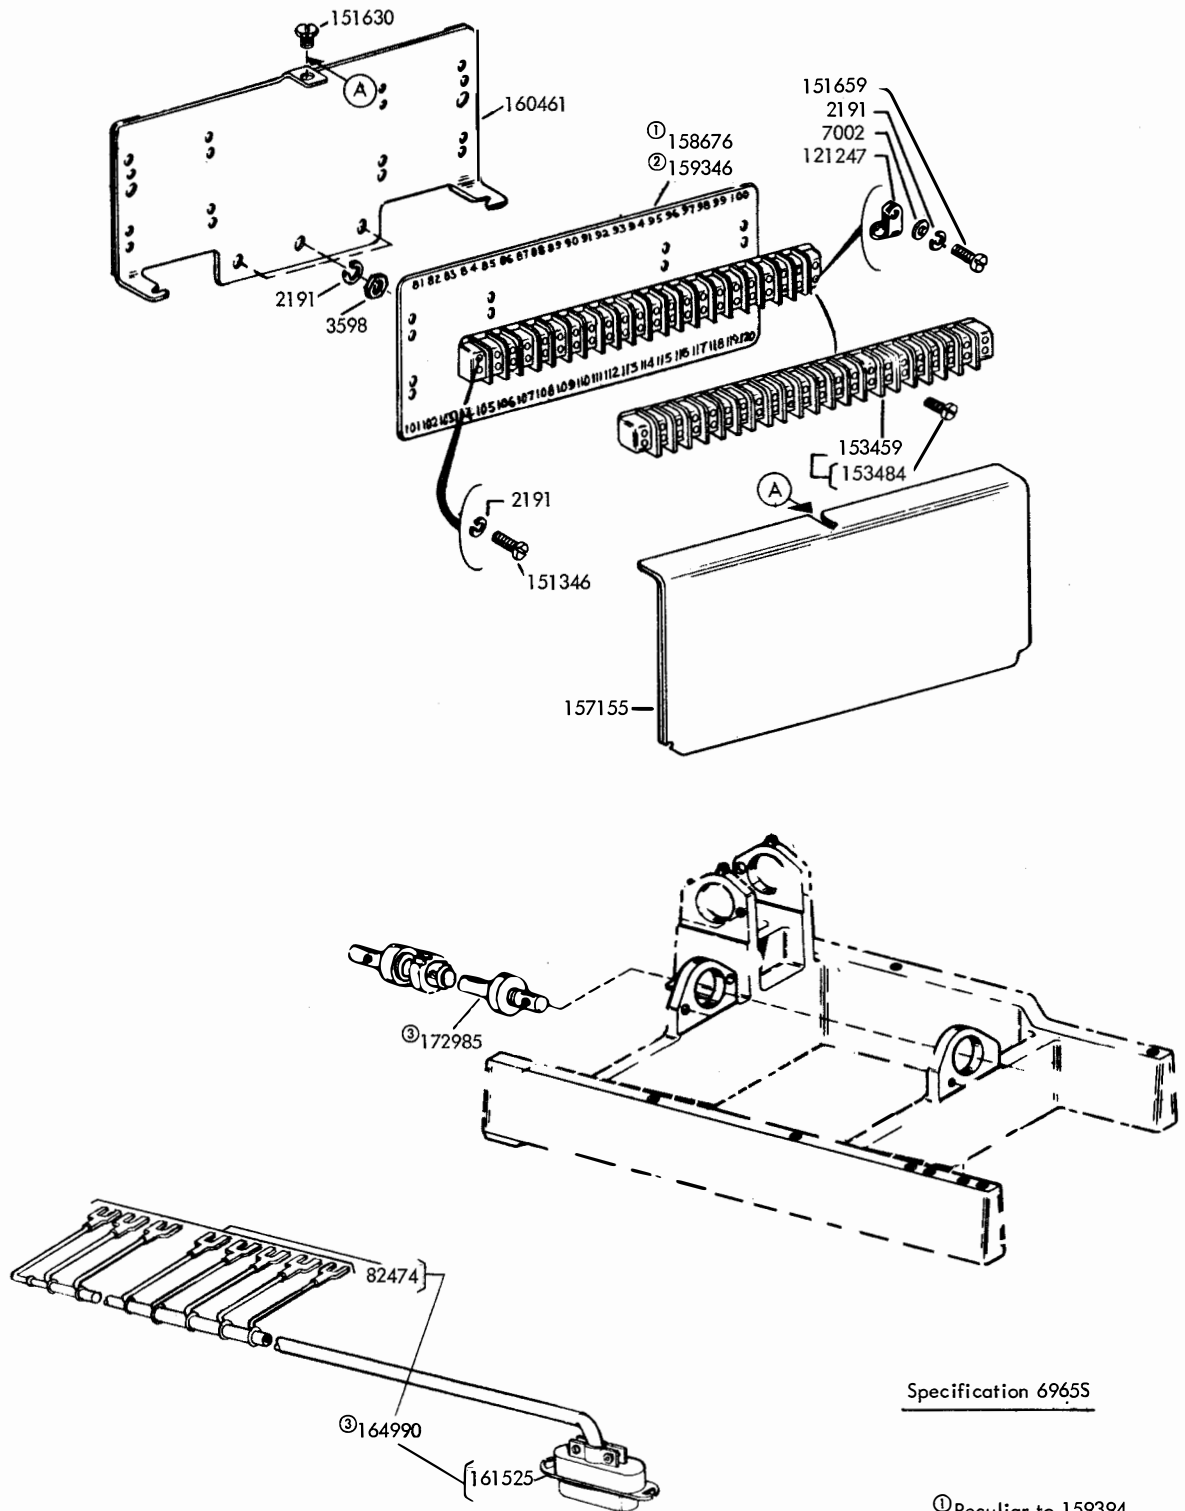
159394 AND 173358 MODIFICATION KITS TO ADD TERMINAL BOARD ASSEMBLY TO APPARATUS CABINET
